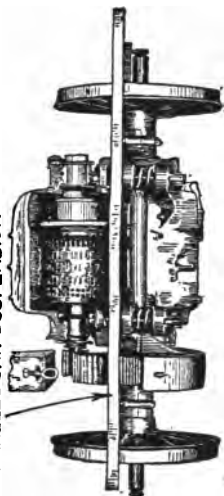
, 102, New Haven geared motor; fig. 8, 103, cradle suspension; fig. 8, 104, New Haven top geared motor.
